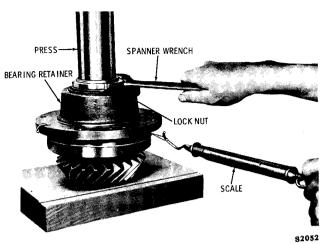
Adjusting bevel pinion gear bearings (VH, VSI series)
